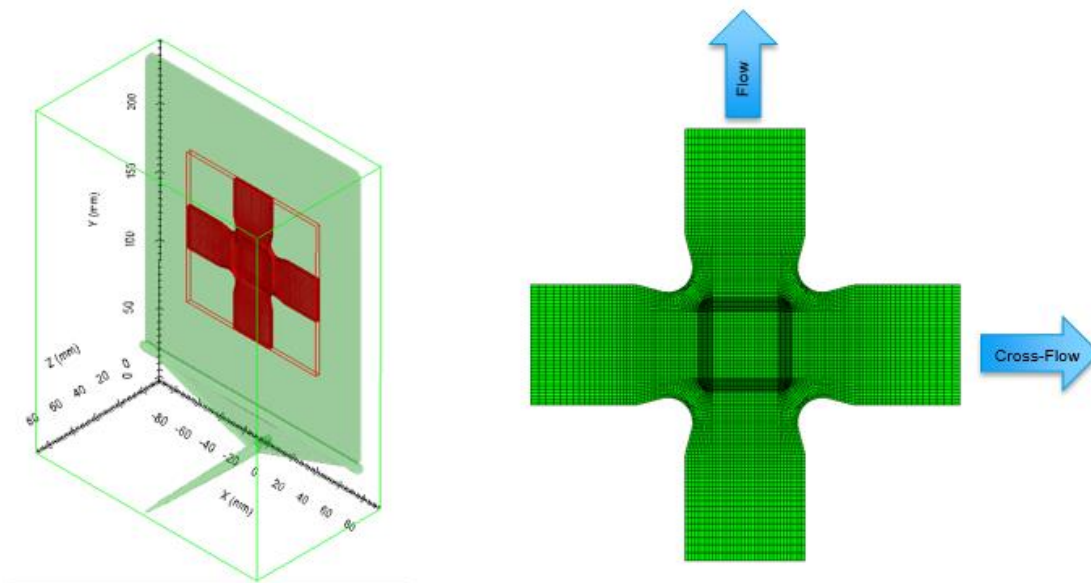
BIAxIAL COUPON CUT FROM INJECTION MOLDED PLAQUE
